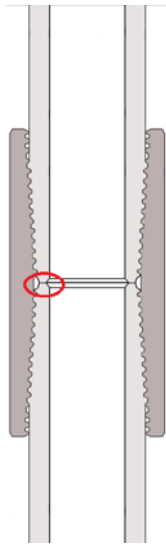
Pin-to-pin contact (Seal-Lock HT, Hunting) [13]
